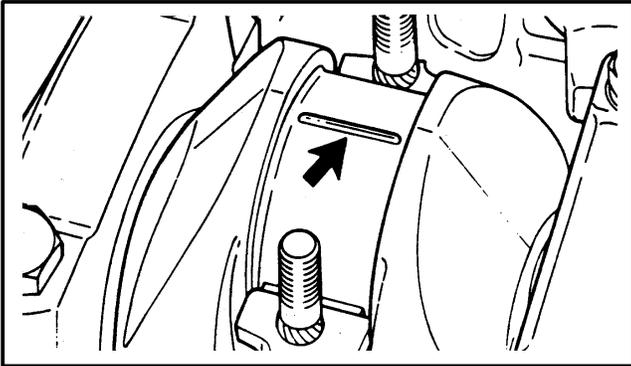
PLASTIGAGE® ON A BEARING JOURNAL
